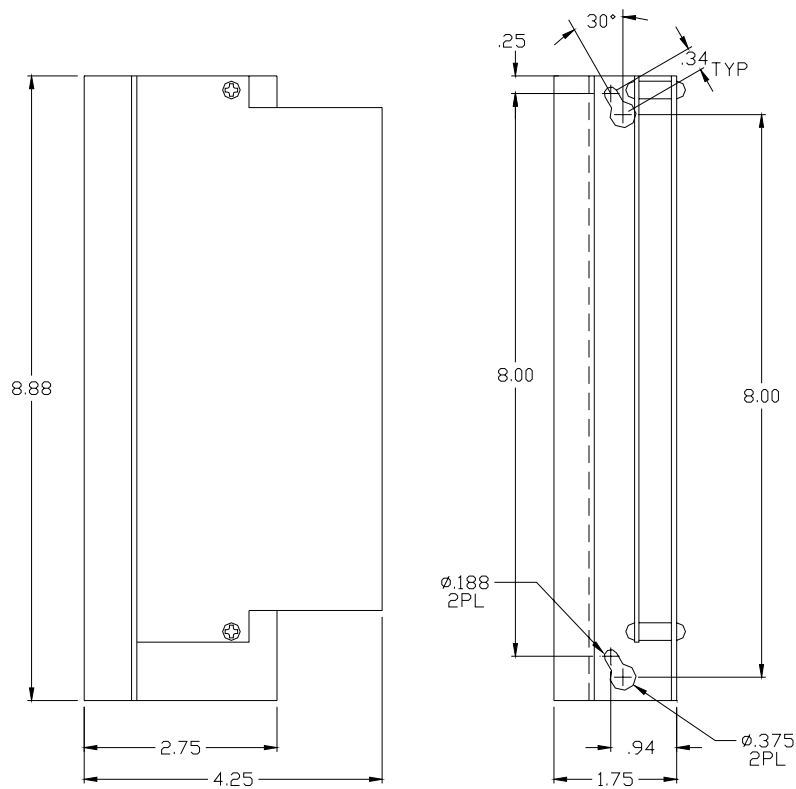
CONTROLLER MOUNTING DIMENSIONS
